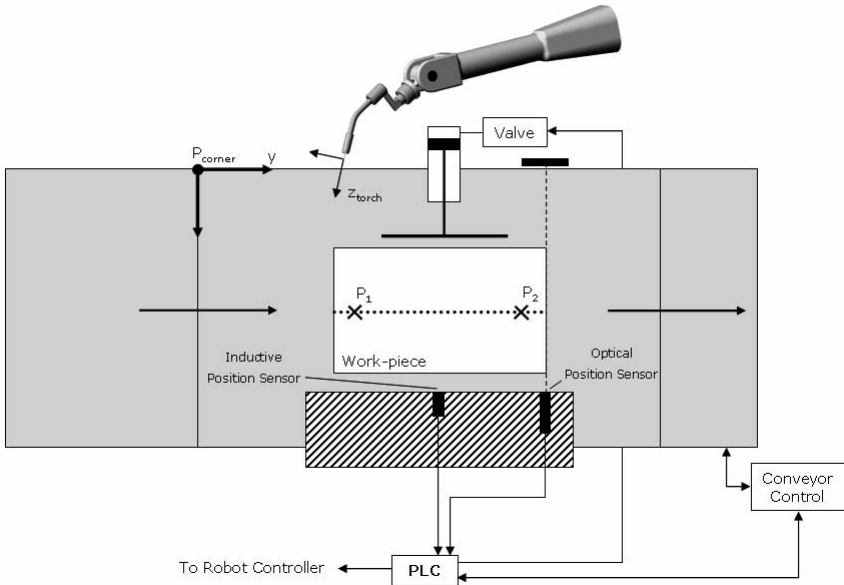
Simply welding example include in a manufacturing line.
